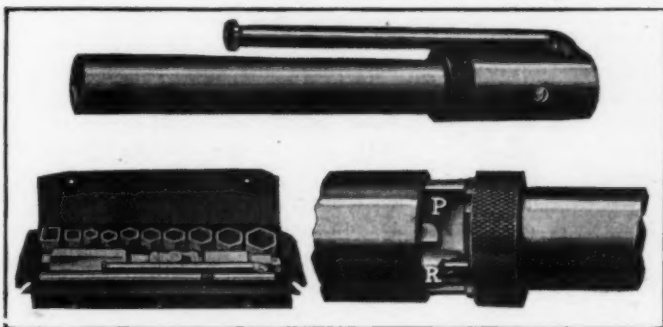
Ray socket wrench, view of complete outfit and construction of roller-clutch movement
